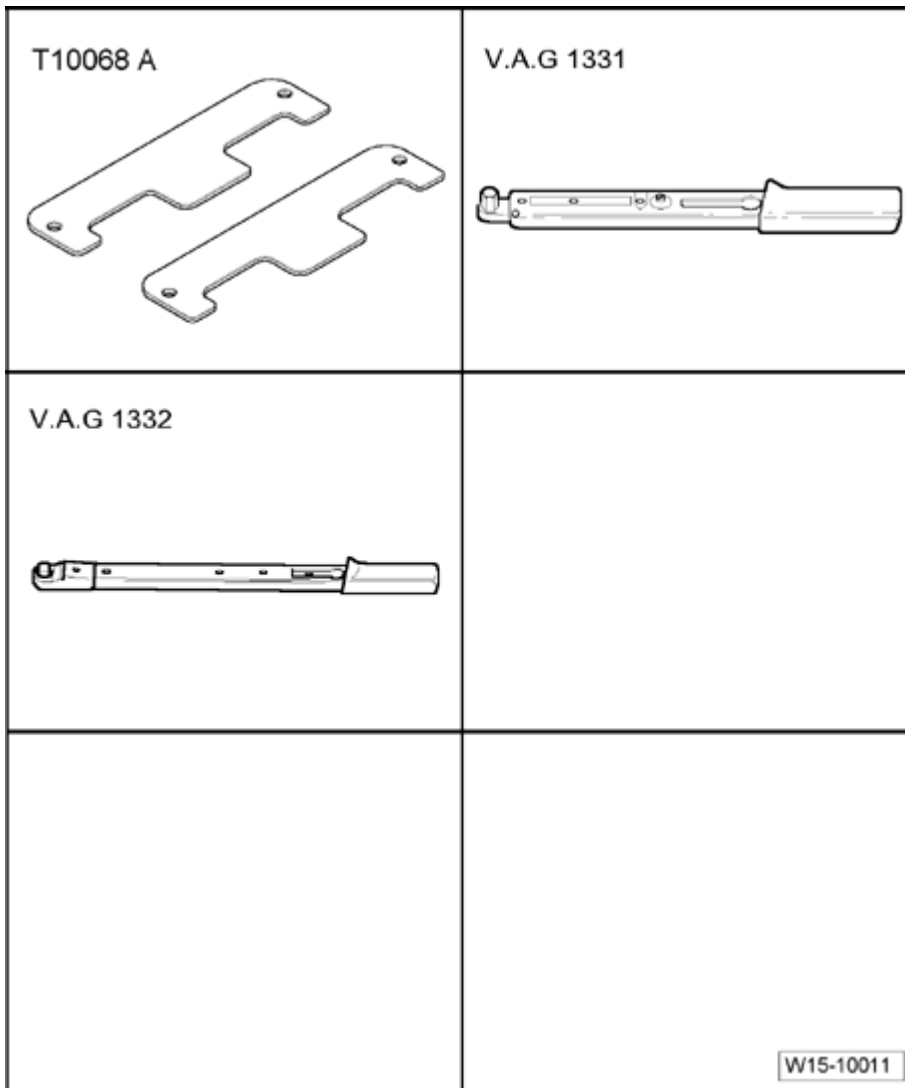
Identifying Special Tools - Camshafts, Removing And Installing
